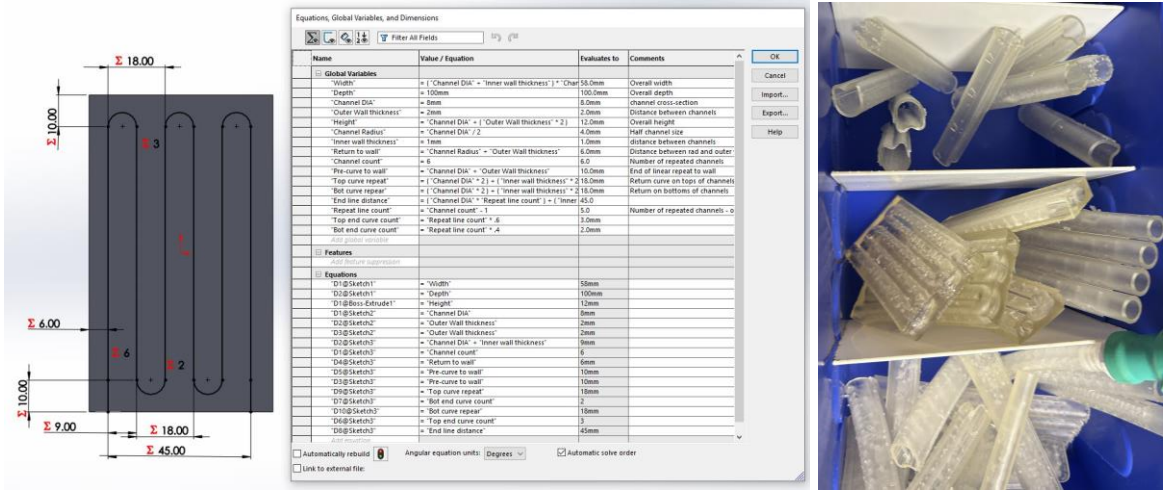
Excel Equation-driven heat exchanger model produced in SolidWorks (Left), 50A TPU 3D printed samples (Right).
